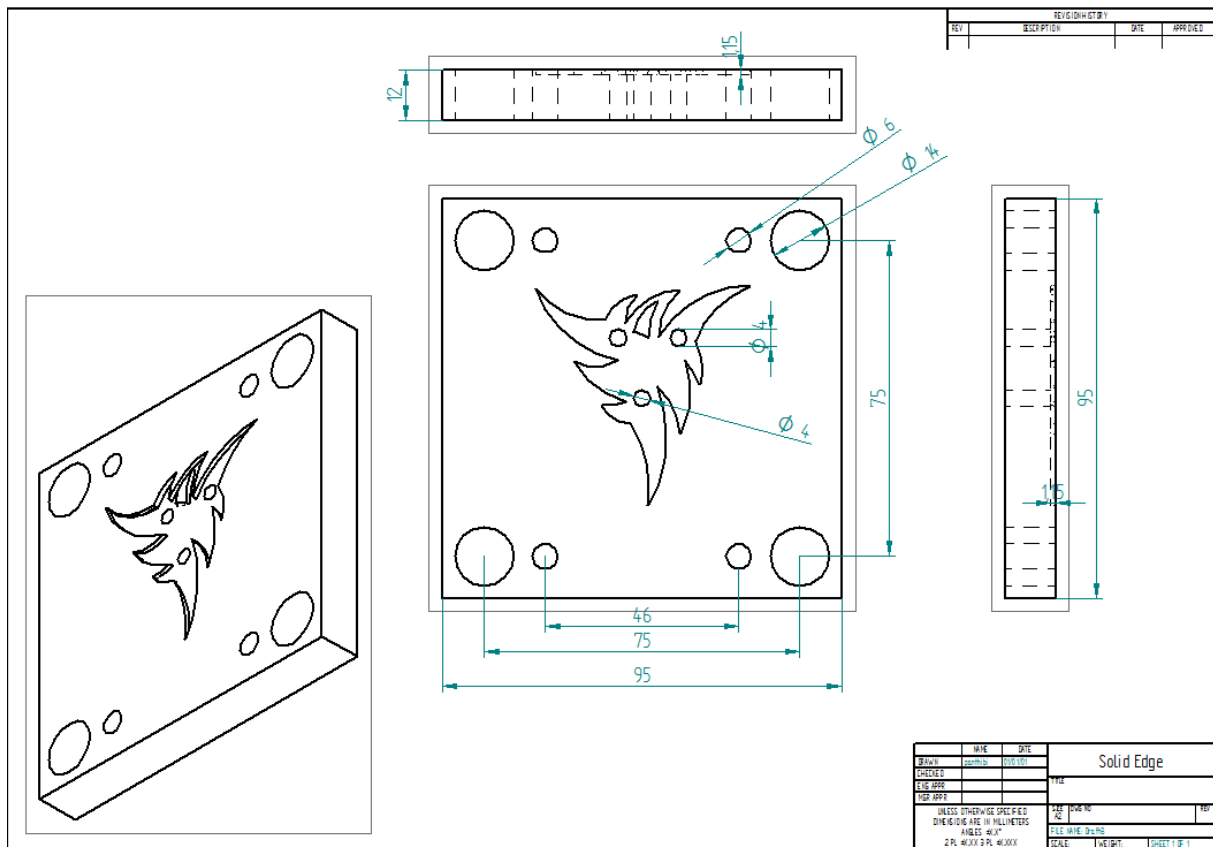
Ejection part of double cavity Mould with ejection hole with dimensions [Drawn by Author in Solid Edge]
